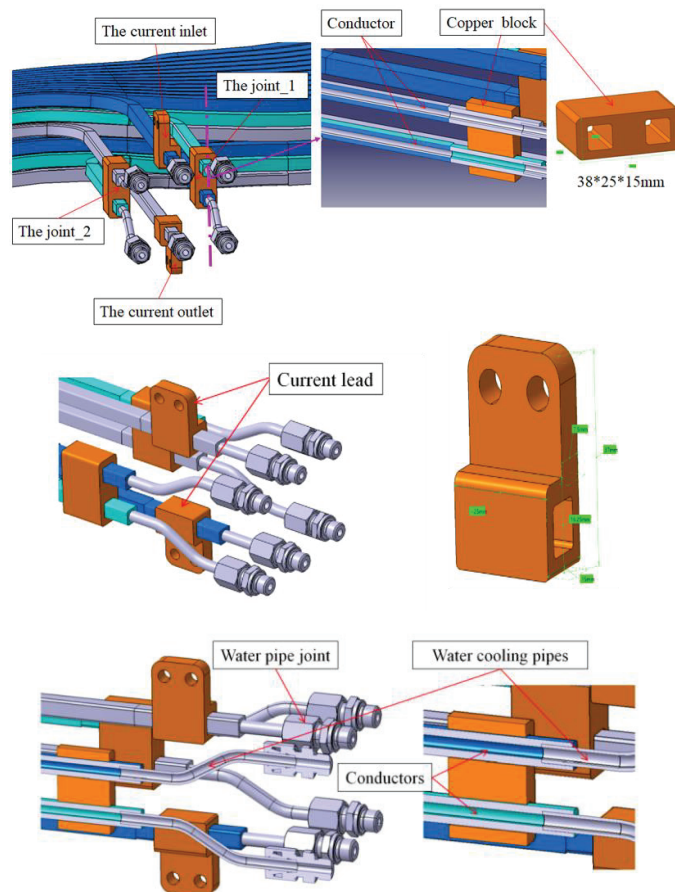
Detail of the conductor joint and the cooling water joint. Copper blocks of joint\_1 and joint\_2 are electrical connections. Insulated hoses are connected to the six water pipe joints (The tube fitting) at the ends of the cooling pipes.
